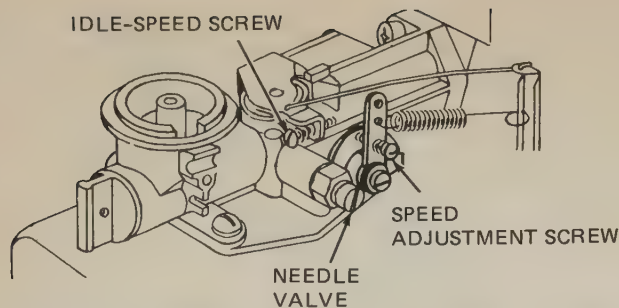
Adjustment screws on a small-engine carburetor. (Briggs & Stratton Corporation)
